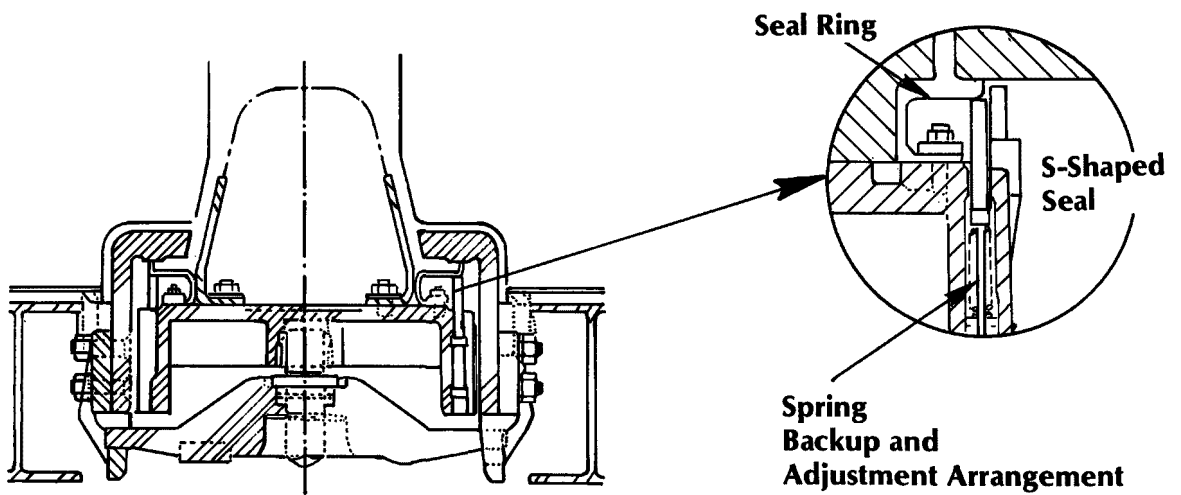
CROSS SECTION OF A TYPICAL COKE-OVEN DOOR WITH AN S-SHAPED SEAL
